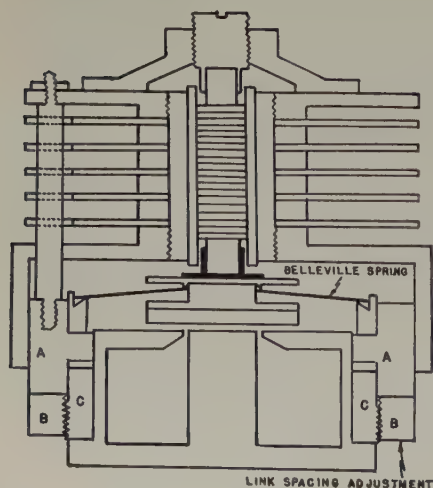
Sectional view of regulator with Belleville-type spring, illustrating the "link spacing adjustment"
